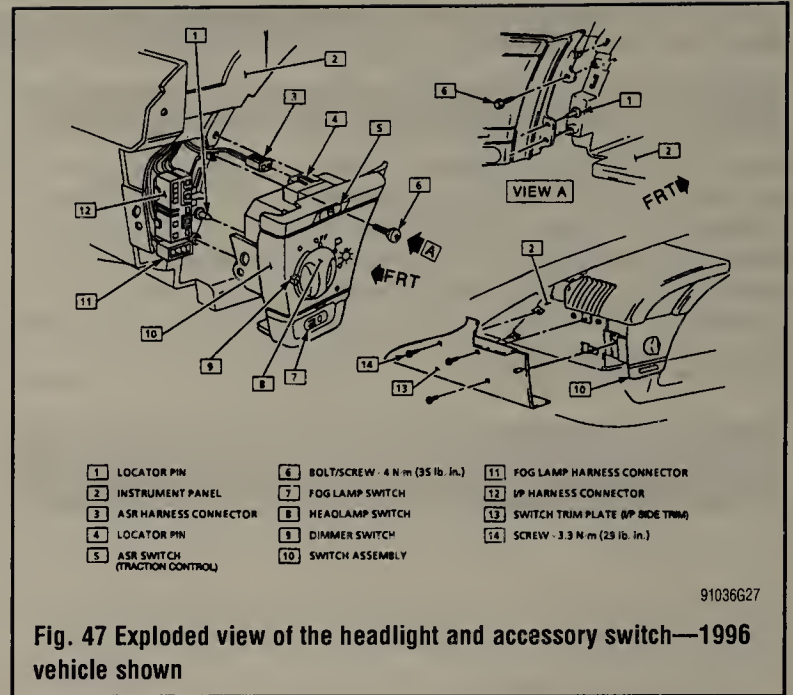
Exploded view of the headlight and accessory switch—1996 vehicle shown
